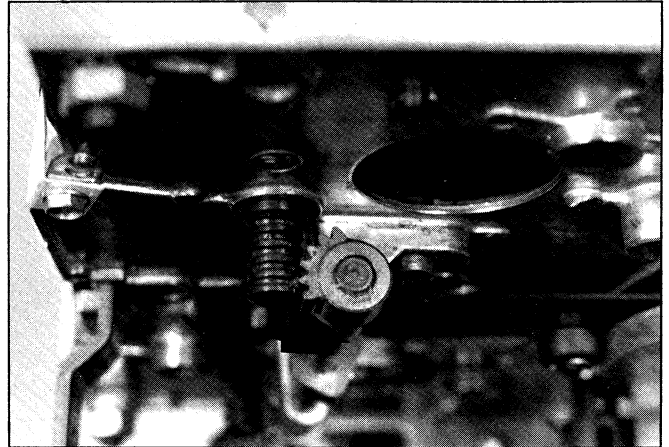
Segment gear outer tooth overlapping end of rear wheel shafts.
